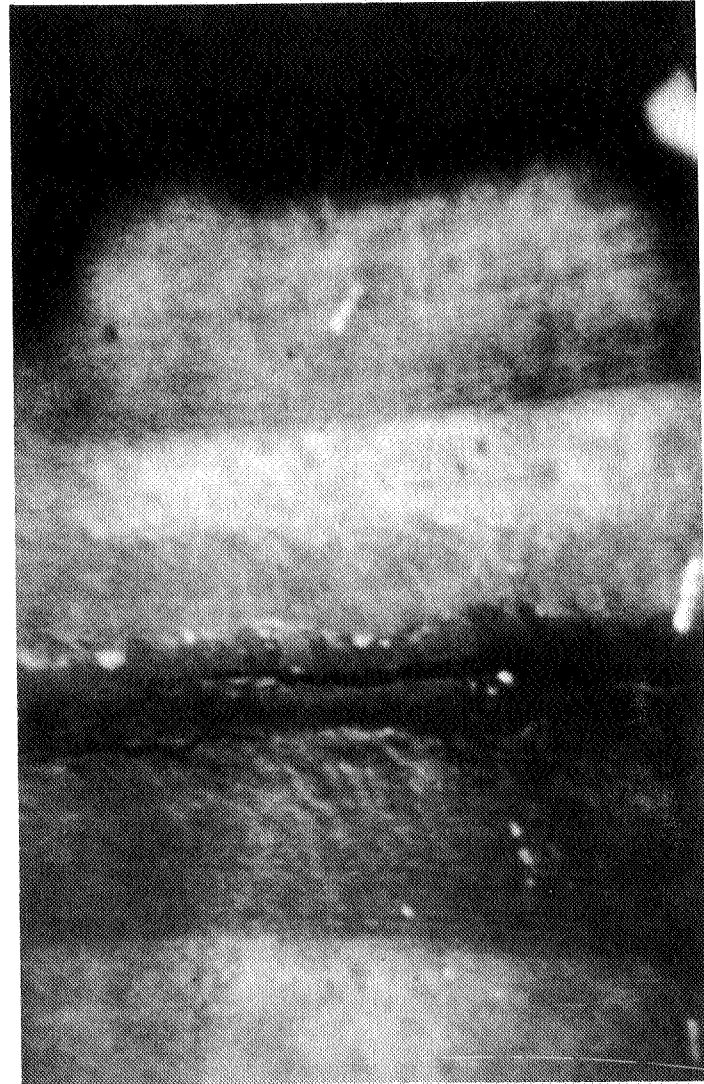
Crack in weld of ammonia reformer catalyst tube.
